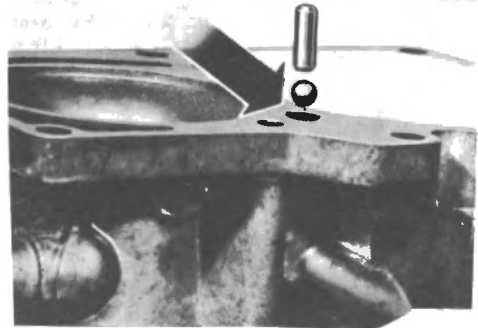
Accelerator pump ball valve and weights - FoMoCo
